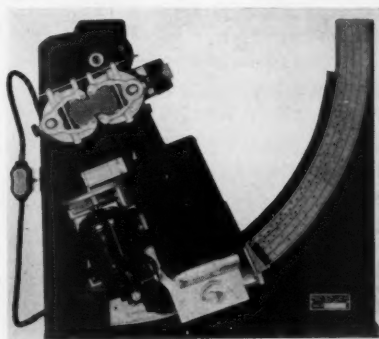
TENSILE STRENGTH OF BAKED CORES DETERMINED WITH UNIVERSAL SAND STRENGTH MACHINE. TEST CORE SHOWN IN HOLDER.
